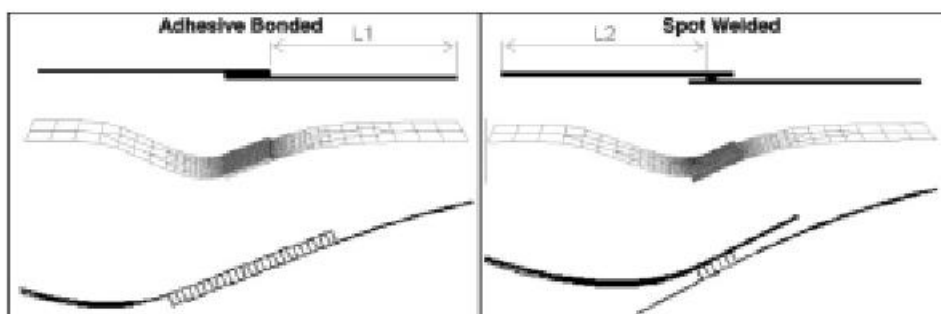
Spot-welded and Weld-bonded stiffness behaviour on tensile shear specimen.
